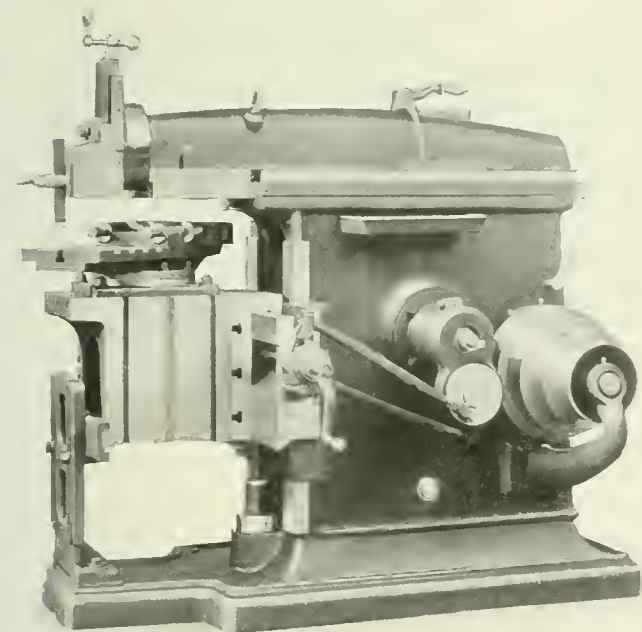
Queen City 16-inch Back-geared Crank Shaper
